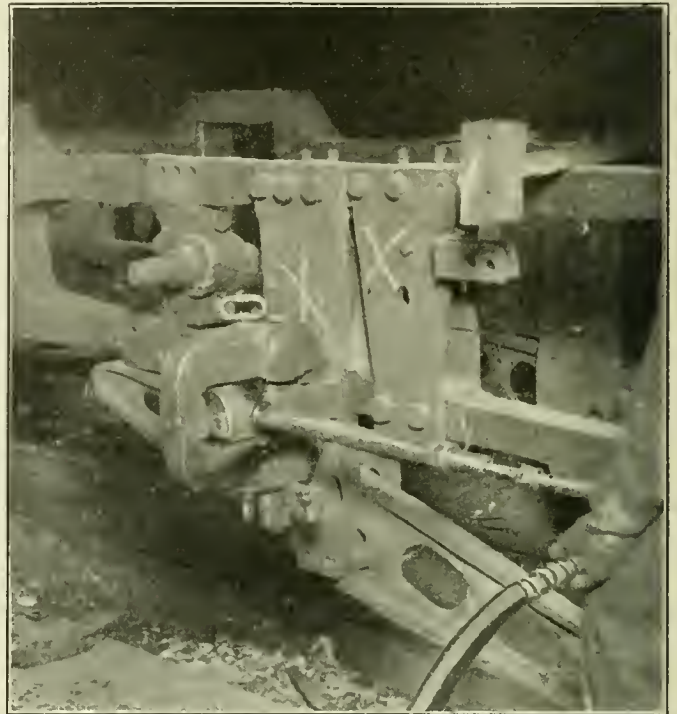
View of Bolt Puller Set Up Ready for Operation
